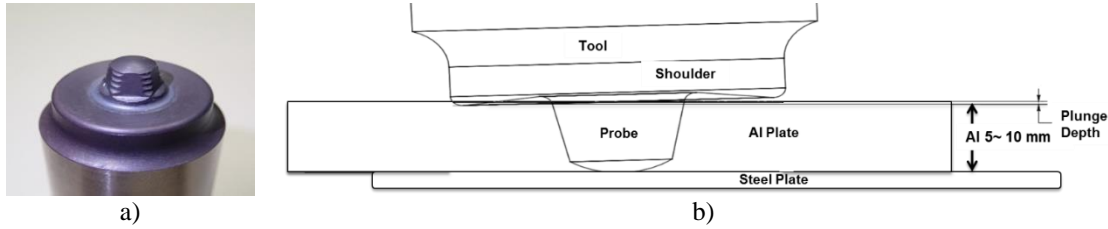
FSW tool and lap configuration with plunge depth, a) FSW tool, and b) Schematic illustration
